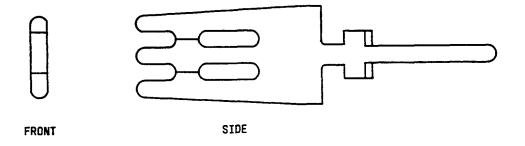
Views of Quick-Clip Terminal Used on 112-Type Connecting Block
